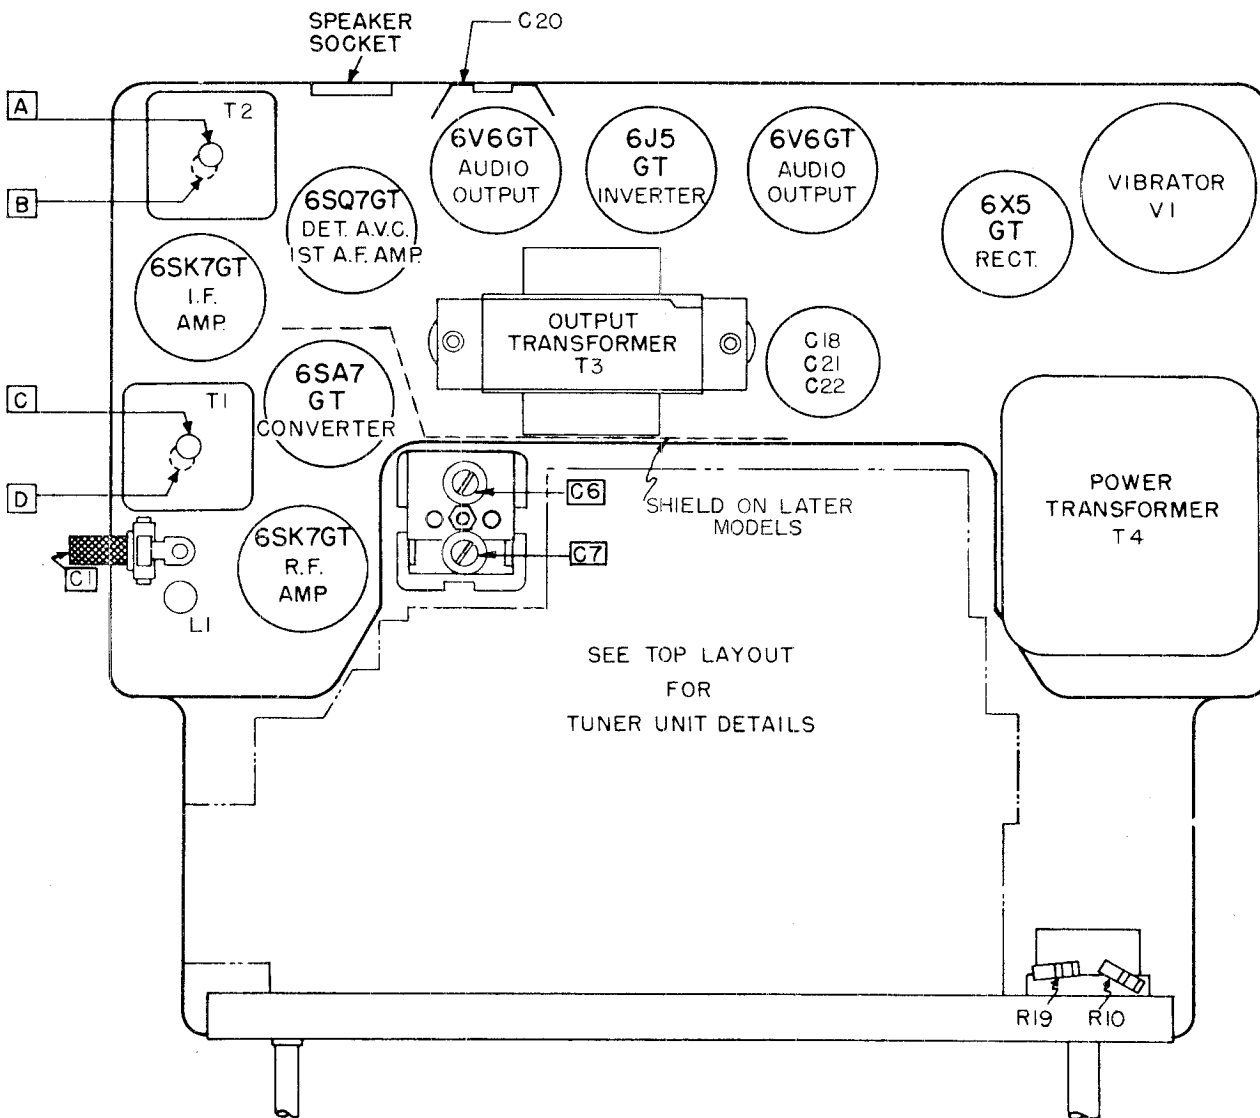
PARTS LAYOUT - BOTTOM OF CHASSIS
